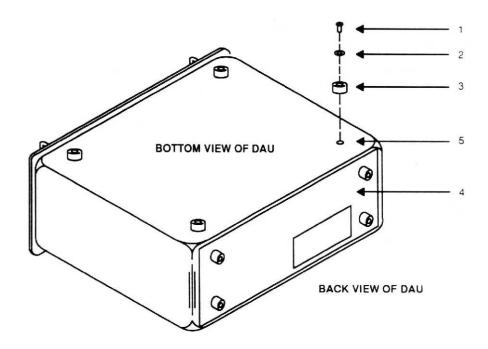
DAU Recessed Rubber Bumper Removal and Installation
